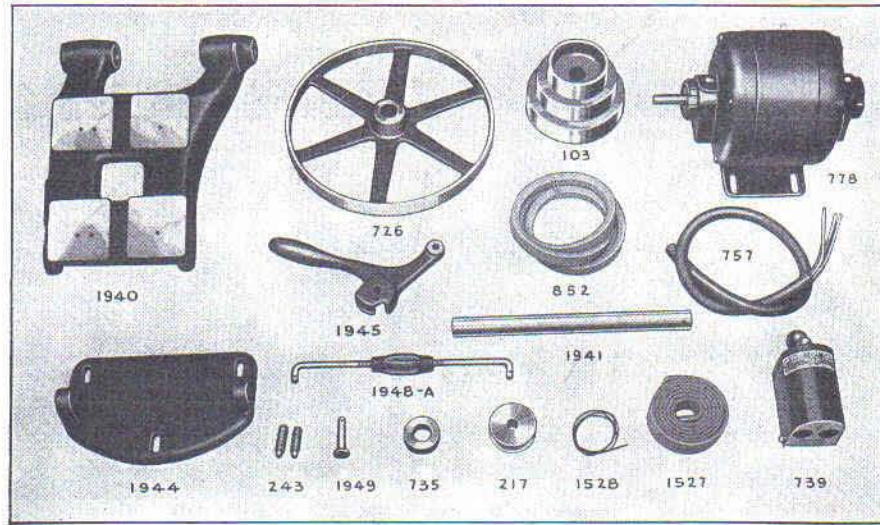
Parts of Adjustable Horizontal Motor Drive for Lathes.
